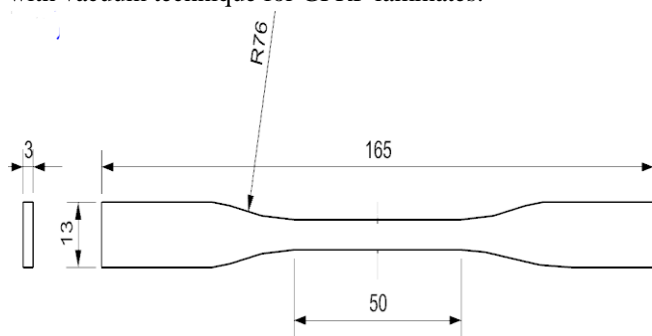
Laminate Tensile Test Dimensions – ASTM D638-02a
